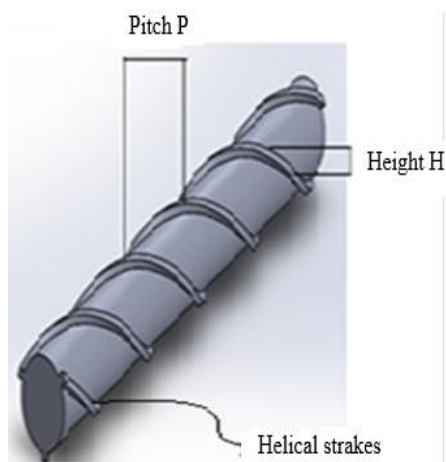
Circular cylinder fitted with triple start helical strakes
